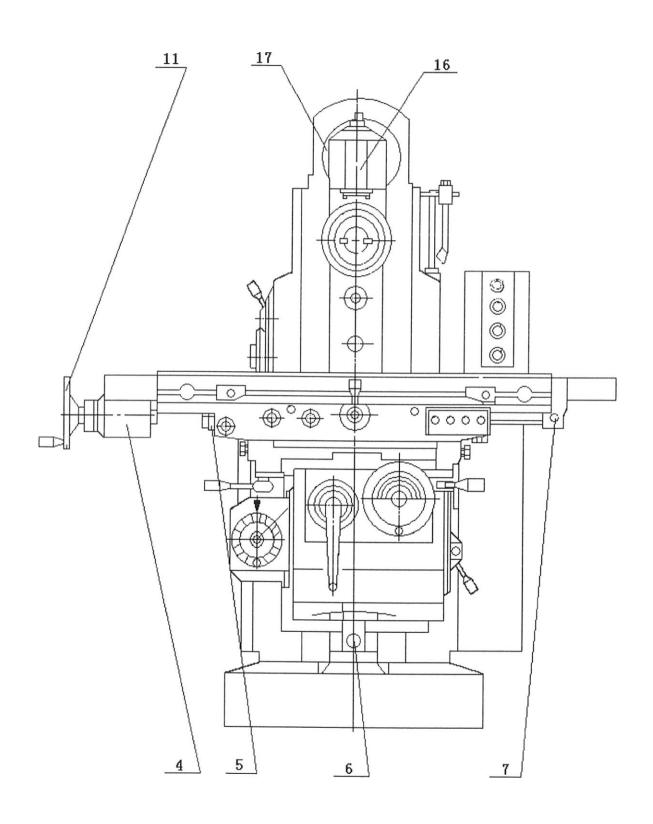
Main view of lubrication position of Universal rotary-head milling machine
